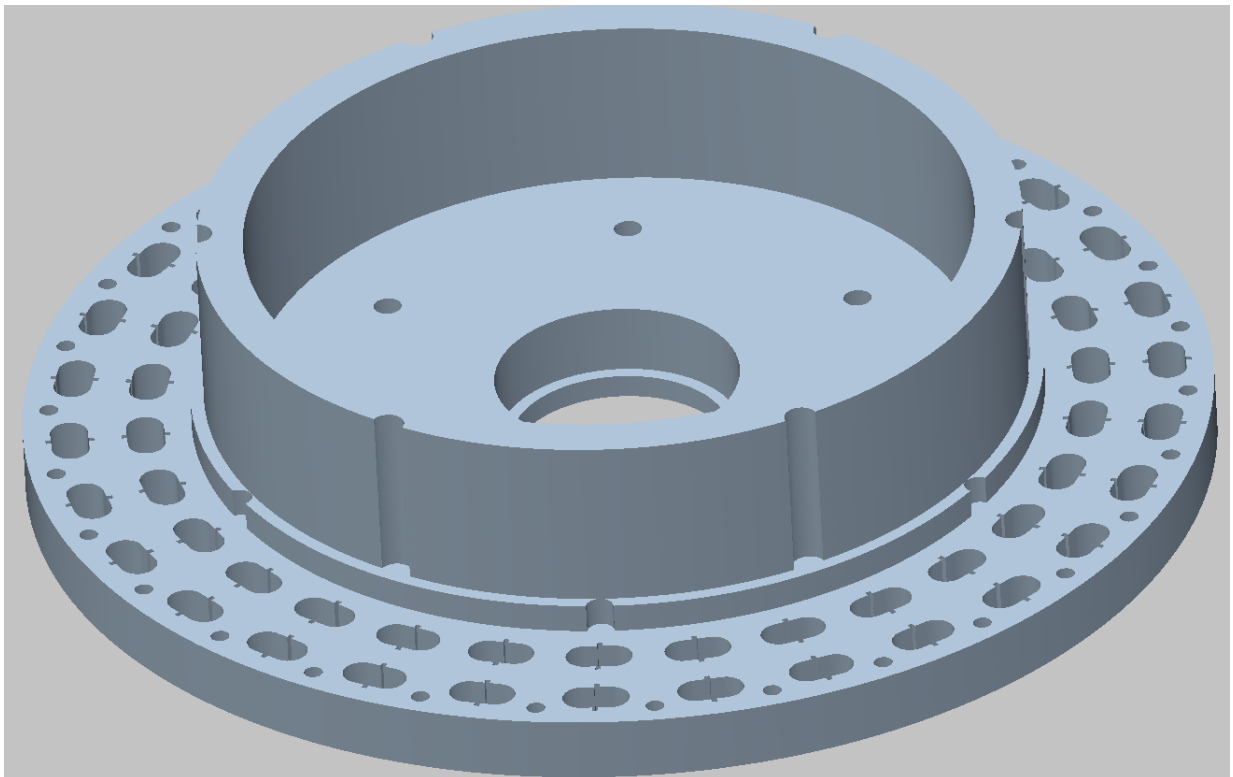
Aluminium stator drum of the machine described in Appendix B.
